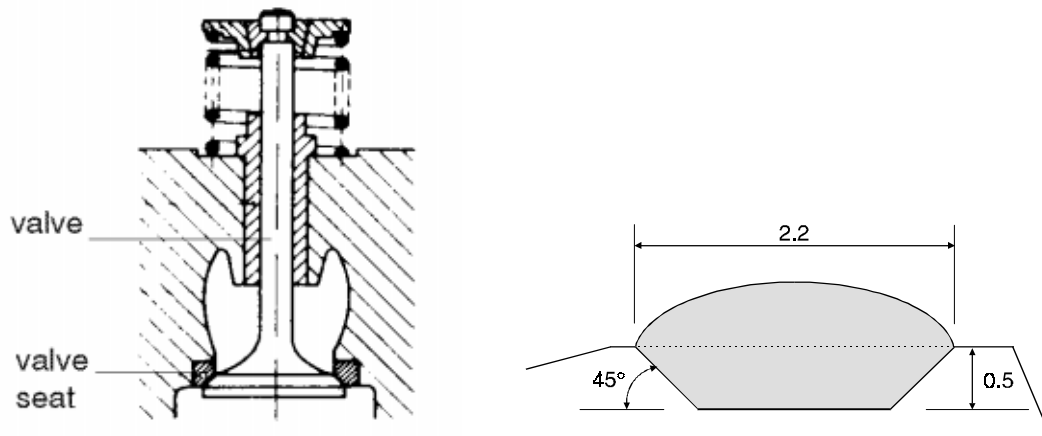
Valve and valve seat as well as the dimensions of the clad [mm].
